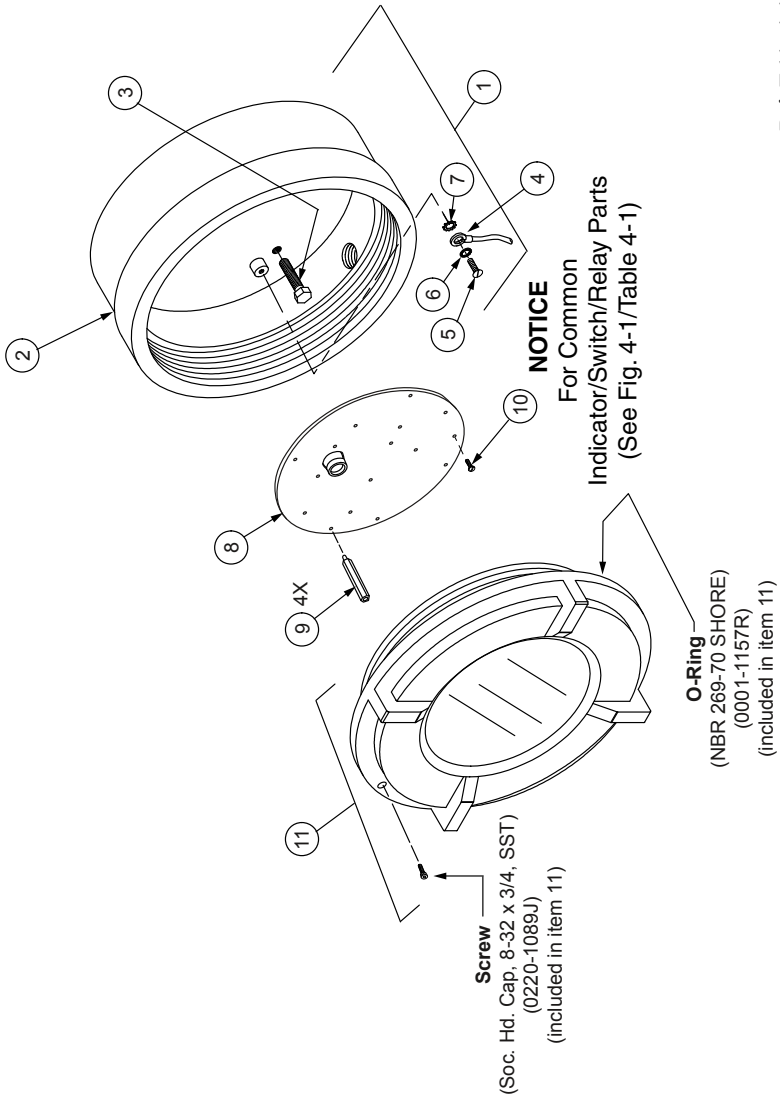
288C (SST Version) Specific Parts Drawing
